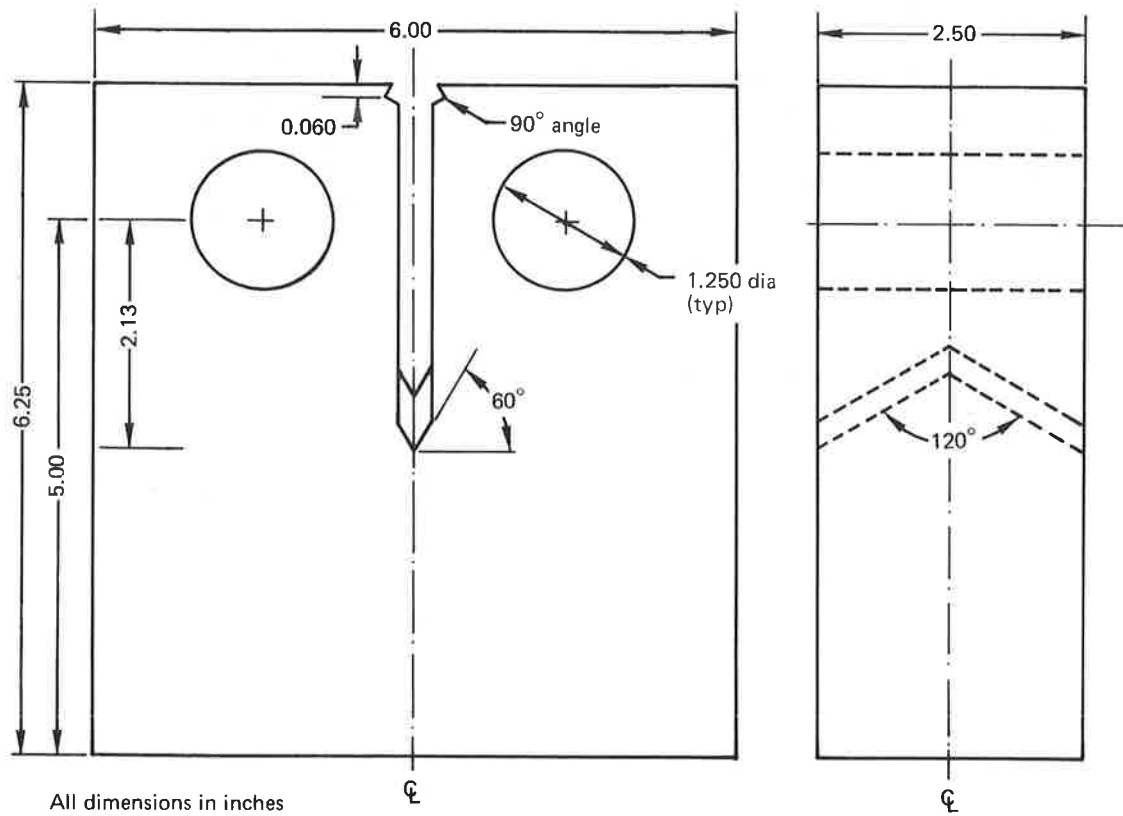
COMPACT TENSION FRACTURE TOUGHNESS SPECIMEN
